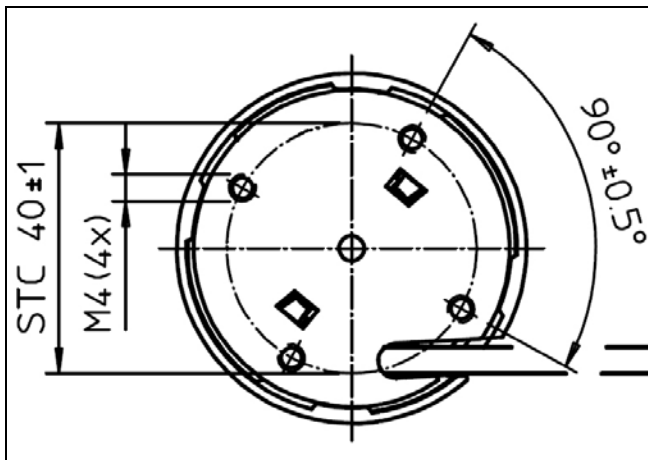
Drill pattern of power coupler mounting flange (55/85W)
